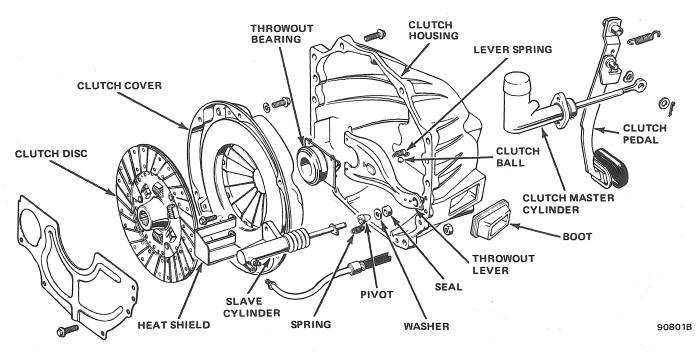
A-4 Clutch Assembly—Four-Cylinder CJ Models
